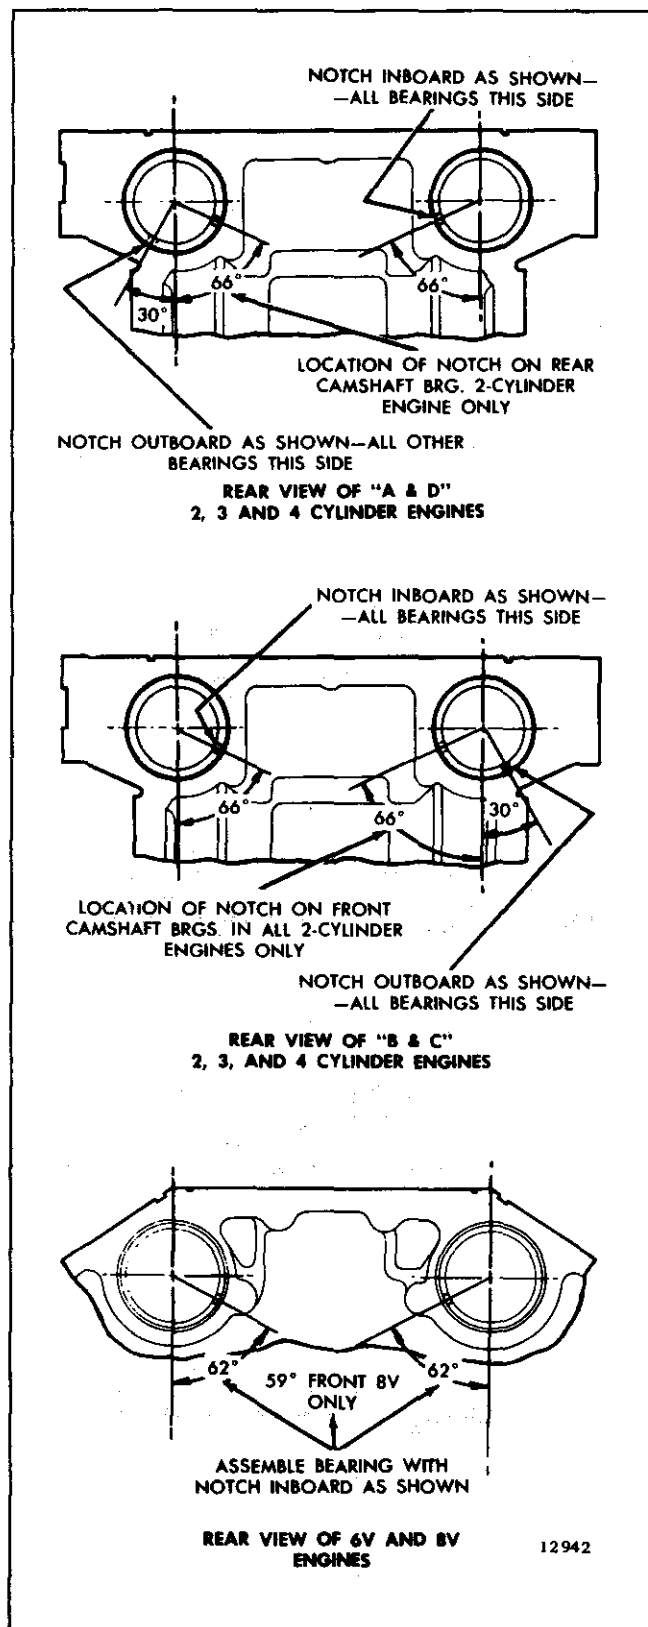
Location of Notch in Relation to Shaft Bore Centerline
